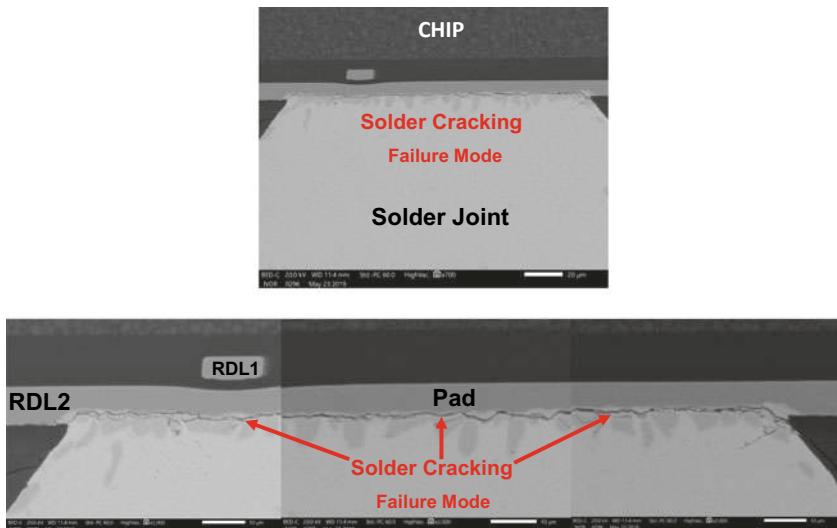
Failure mode of the PCB assembly of the heterogeneous integration under drop test
